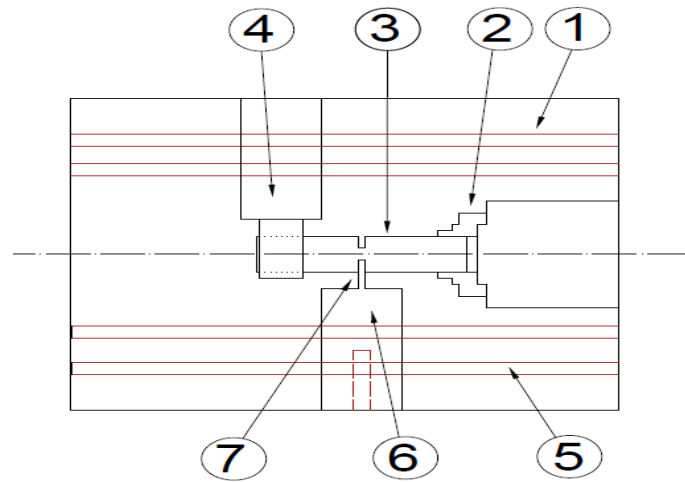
General Arrangement Drawing of Special Purpose Fixture for Cnc Lathe Machine
